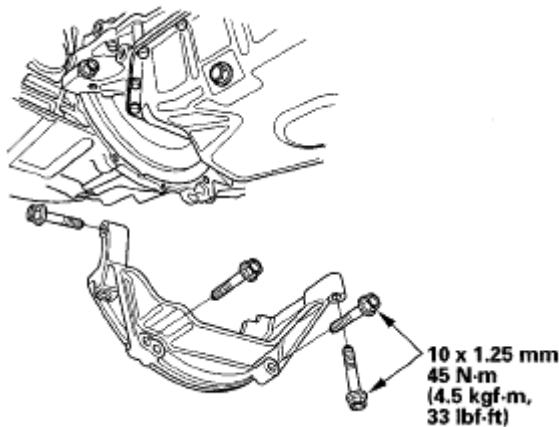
Identifying Clutch Cover Bolts With Torque Specifications
